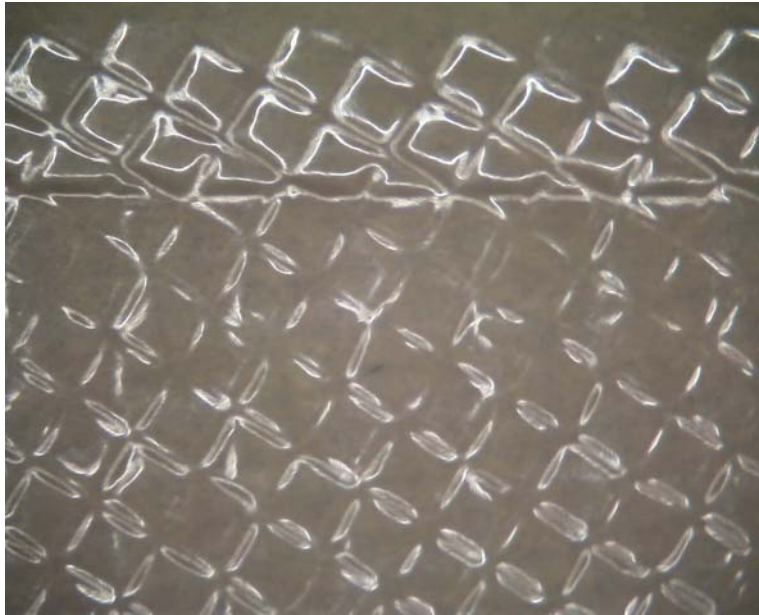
Cooling Bar Alignment Problem [Under the microscope the area below the horizontal line (where the cooling bars pattern was superimposed on the ultrasonic welder pattern) clearly shows the ultrasonic pattern and looks similar to the area without cooling bar imprint (above the line).]
